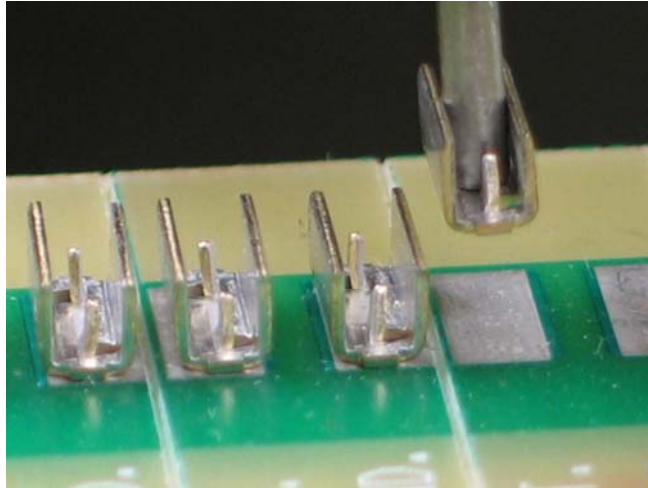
Vacuum pick-up nozzle placing part on SMT PCB
